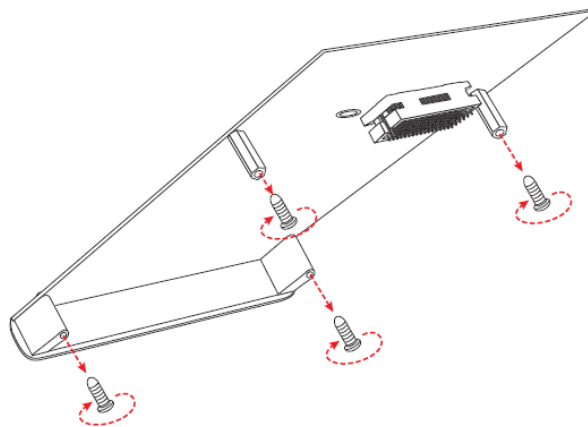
Unscrewing a freshly unpacked SA-class XMC board
